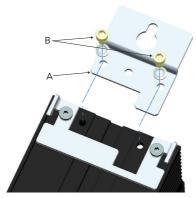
Bulkhead mounting 80A/100A unit shown (125A similar)
